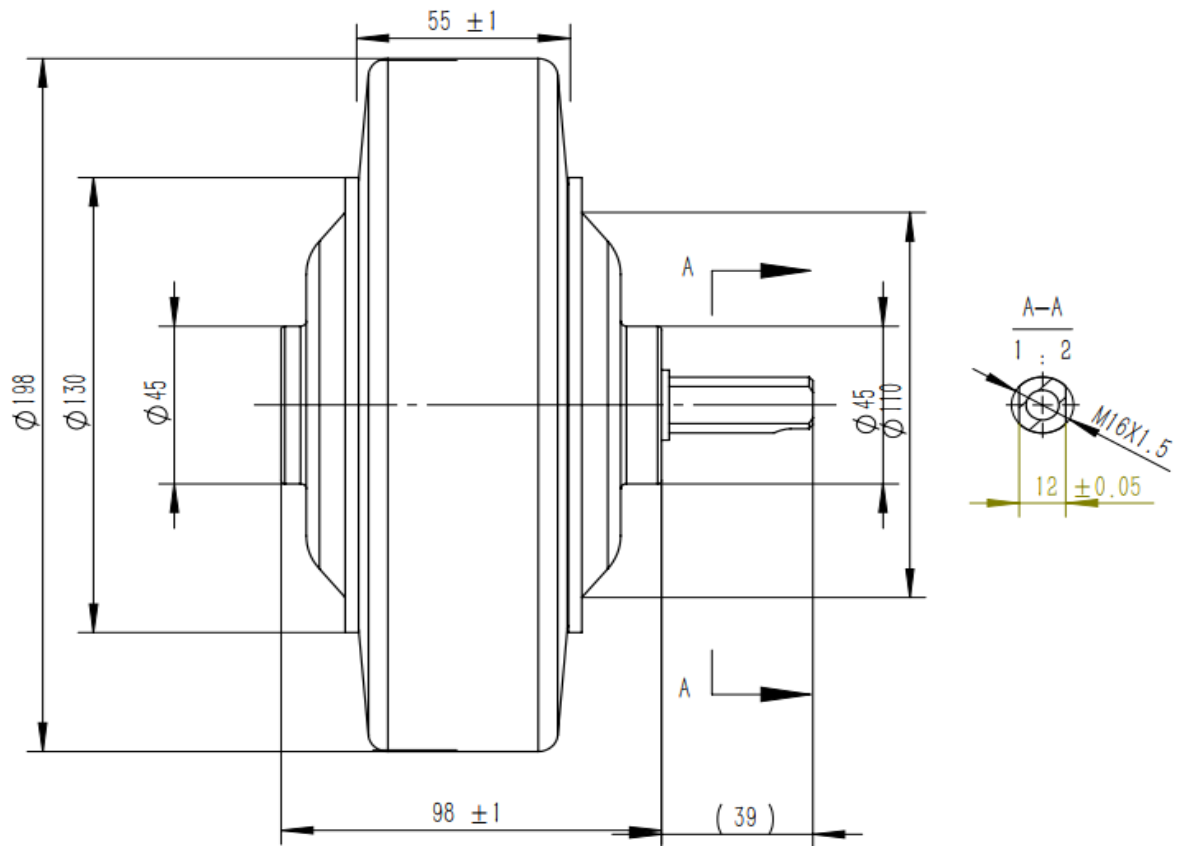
8 inch 13Nm/15Nm coated polyurethane tire hub motor mounting size
